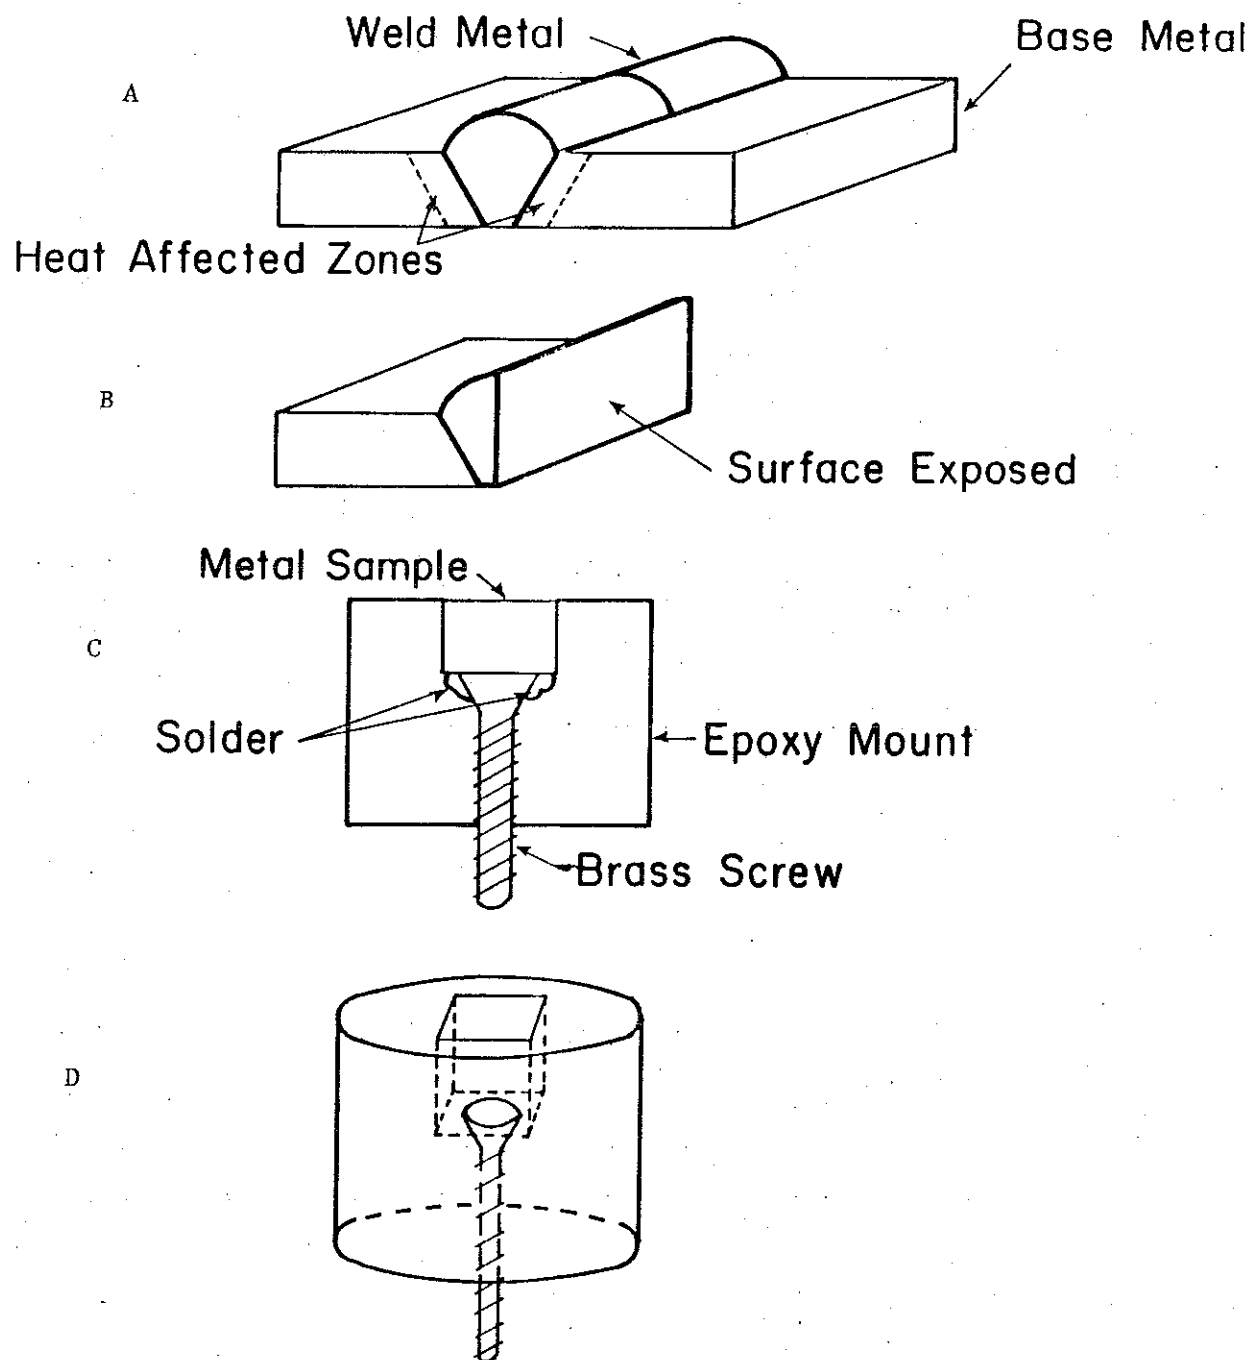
A) Cross-section of weld, B) Cut weld
